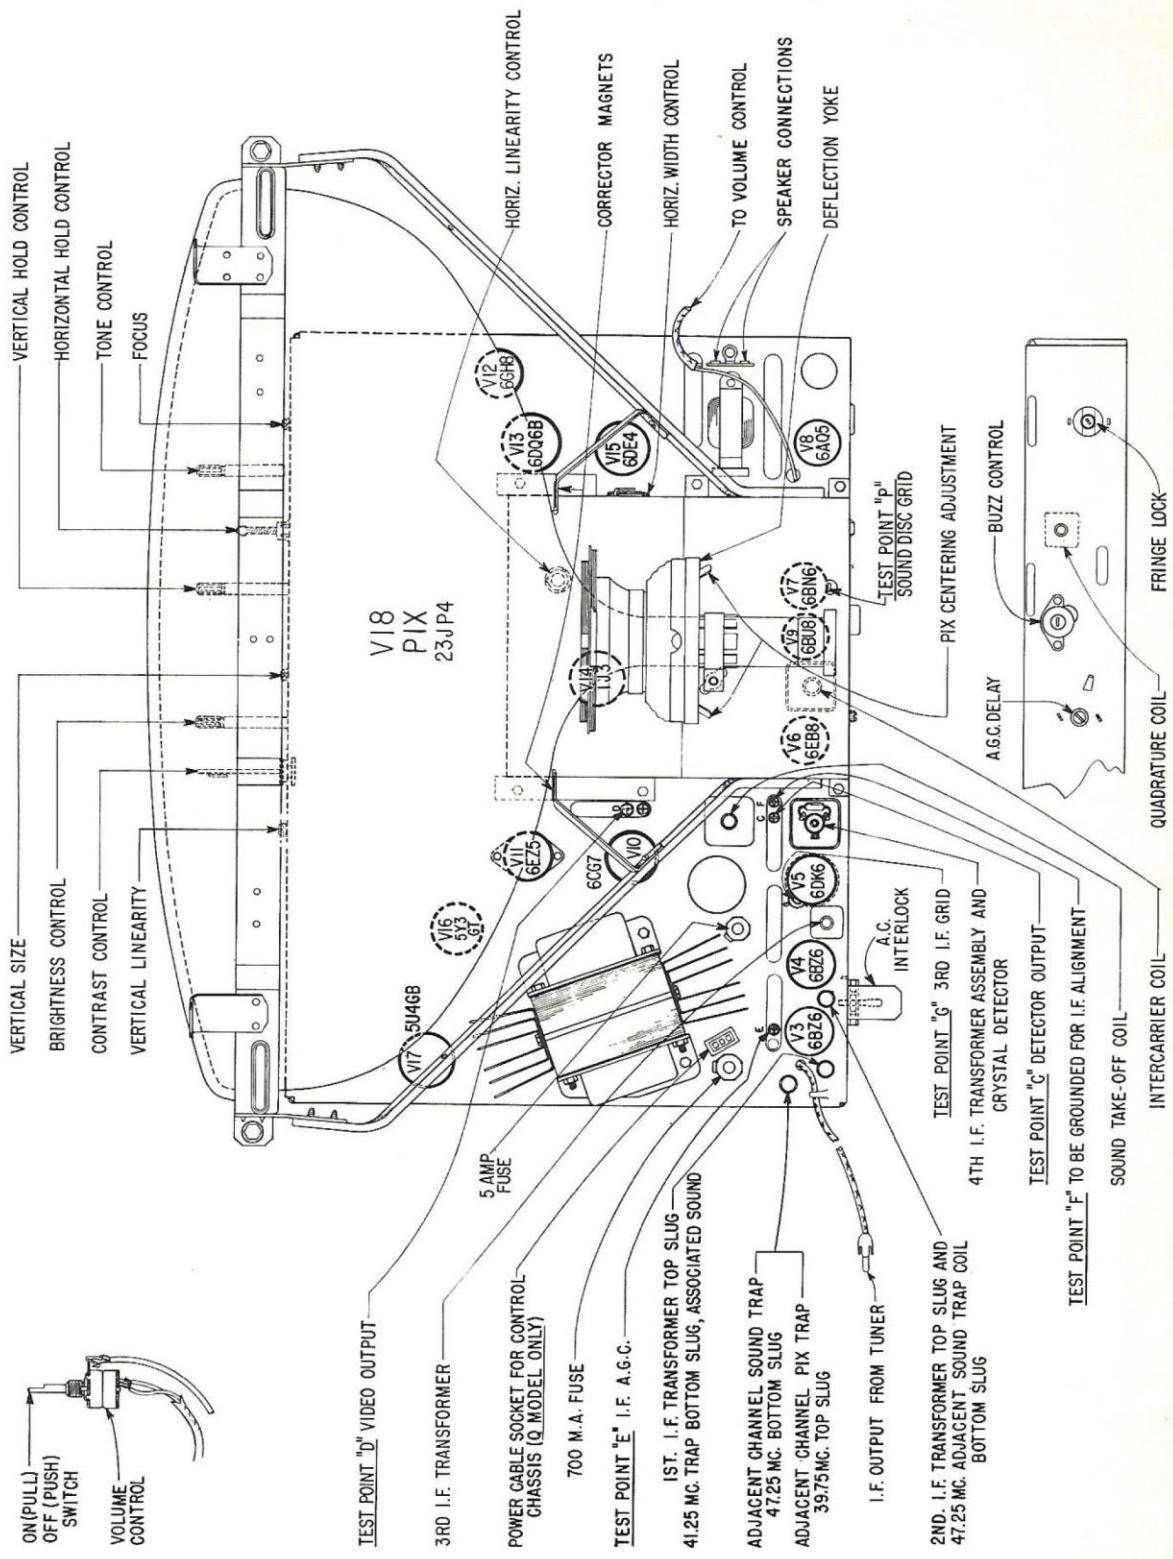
Tube and Trimmer Layout 16E27 and 16E27Q Chassis
